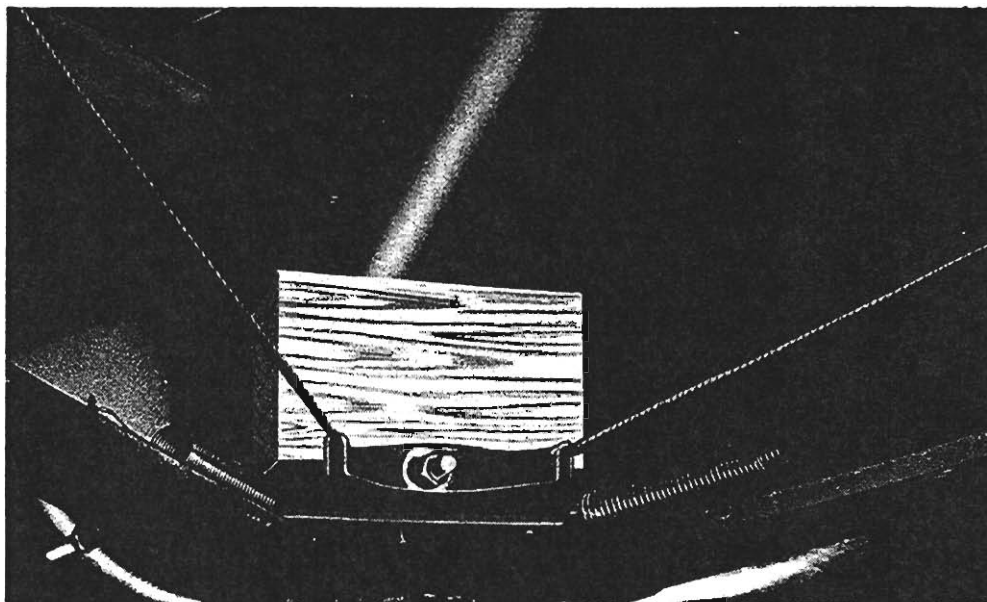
Removing Inner Axle Shaft Oil Seal from Housing
